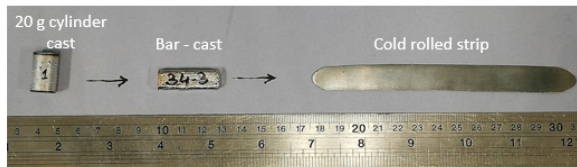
Example of 20g RAP specimen cold rolled to 1mm strip.
